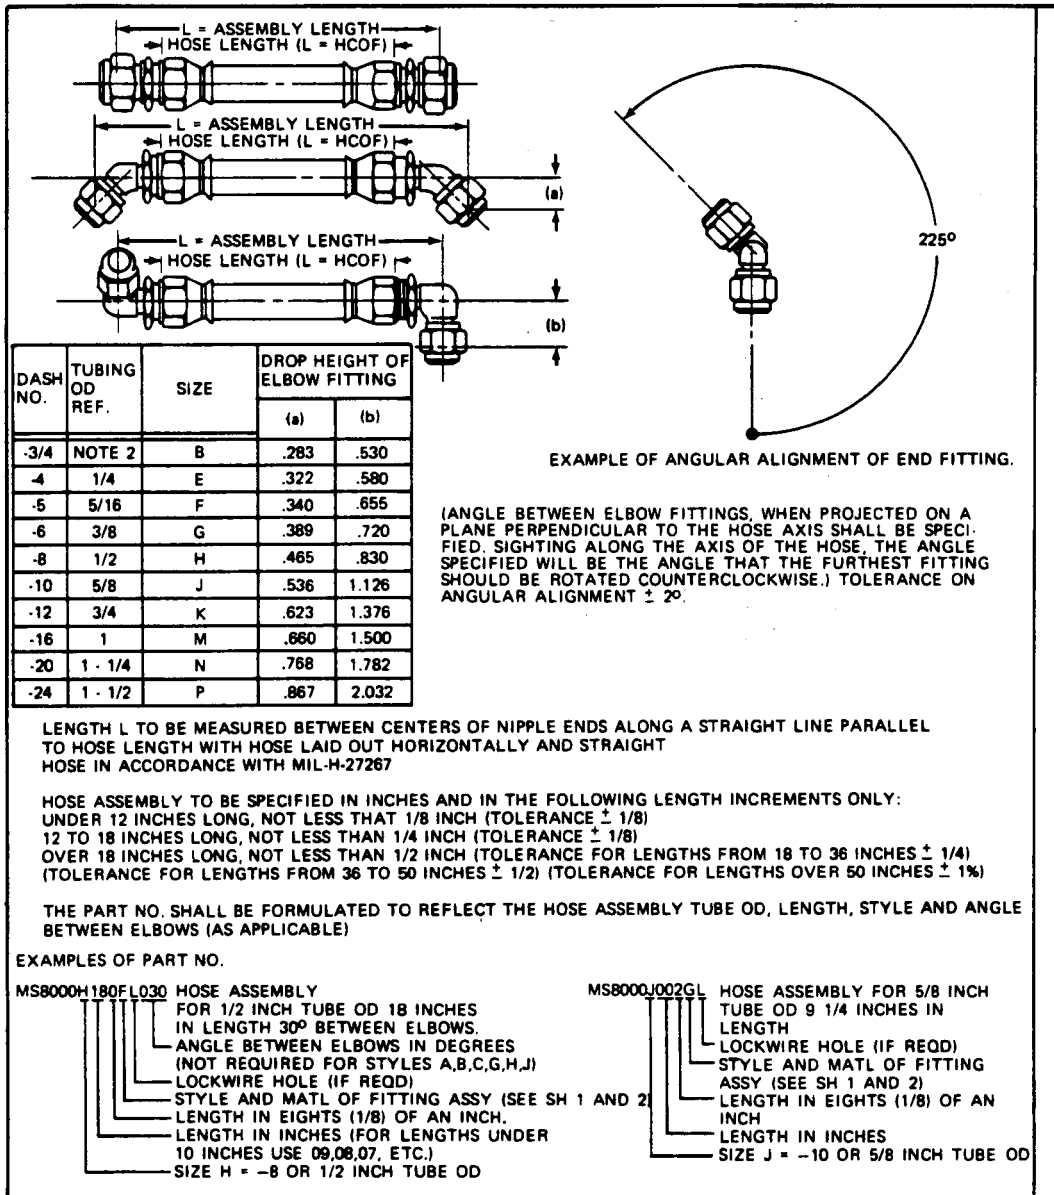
Hose Assembly MS8000 Series (Sheet 1 of 9)
